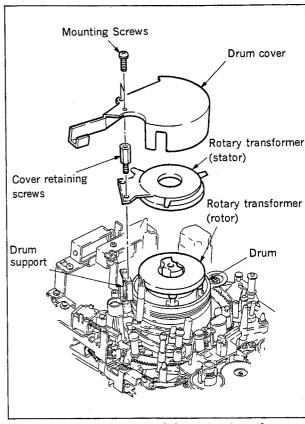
Drum cover and the rotary transformer (stator)
